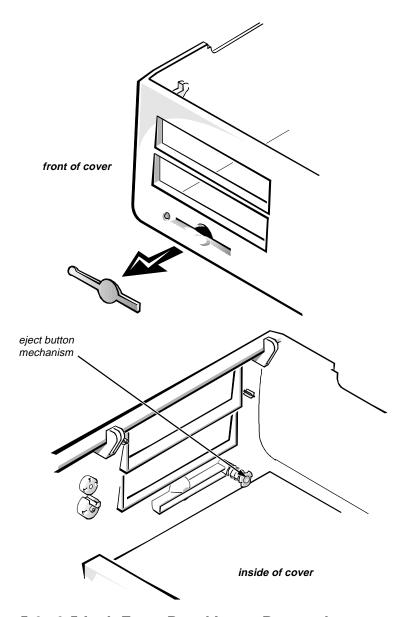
3.5-Inch Front-Panel Insert Removal
